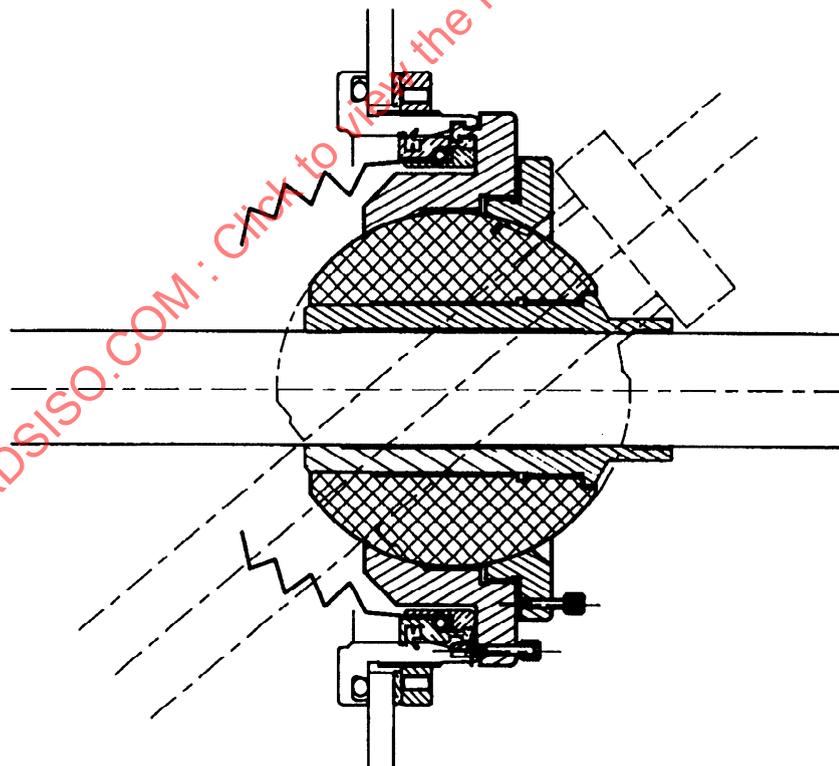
Remote-handling tong gaiters for type 2 — Detail of fitting of the tong
